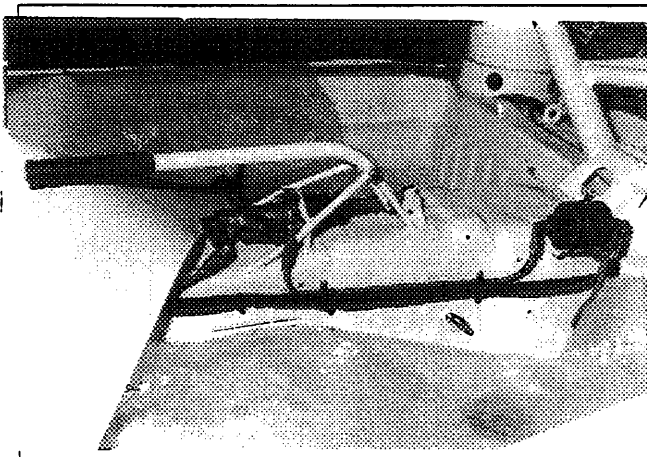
ALTERNATIVE HYDRAULIC HANDBRAKE
